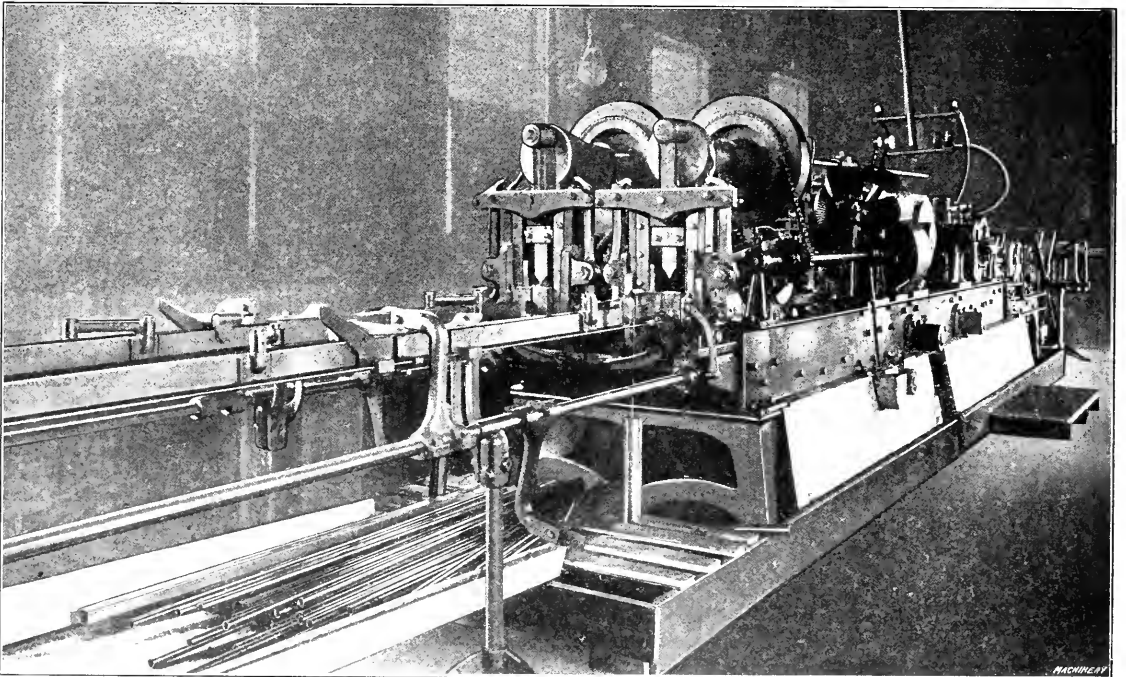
Rear View of Machine for making "Welded Seamless" Tubing, showing Finished Tubes made in the Machine
